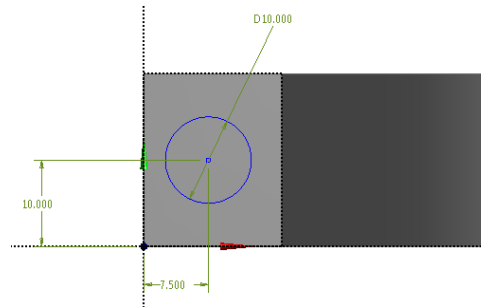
Generating the dimensions of the sketch for cutout feature
